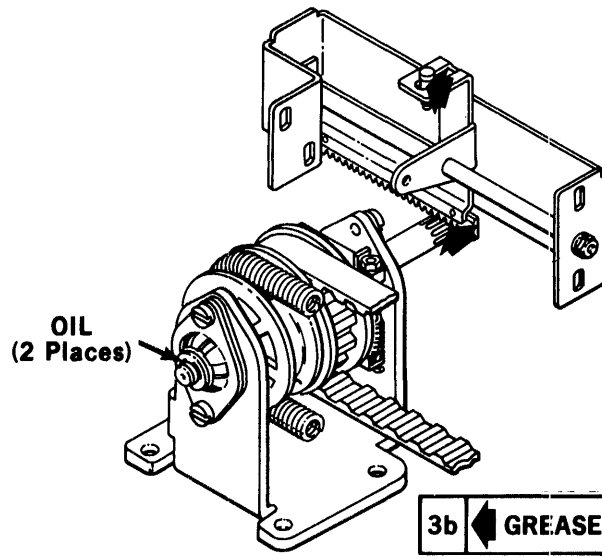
IDLER AND RIBBON FEED DRIVE
